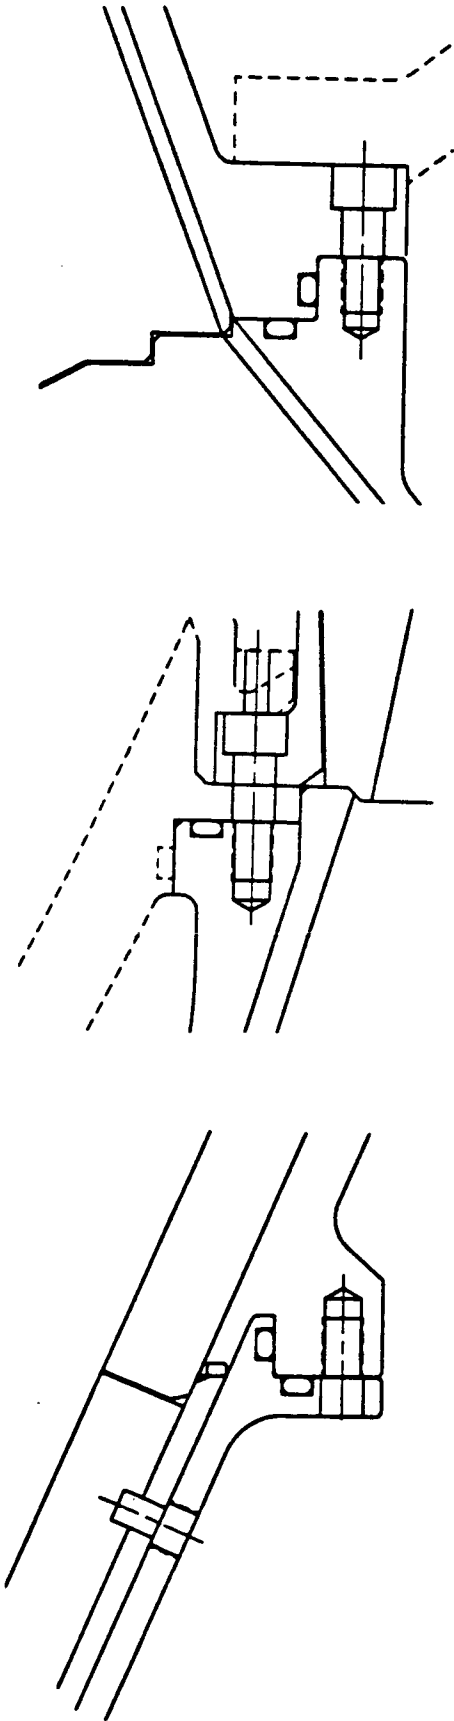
REVISED NOZZLE JOINT SEAL DESIGN.
